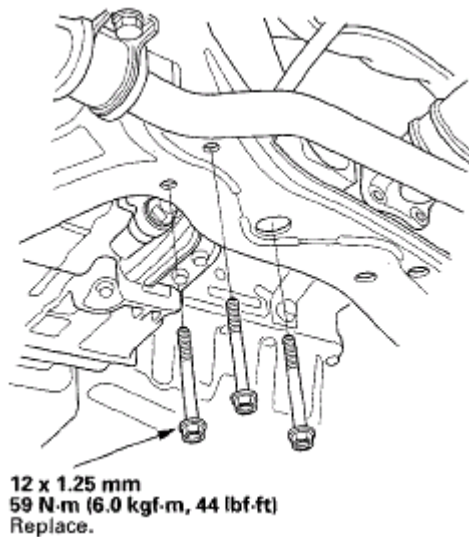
Identifying Rear Mount Mounting Bolts (With Torque Specifications)
